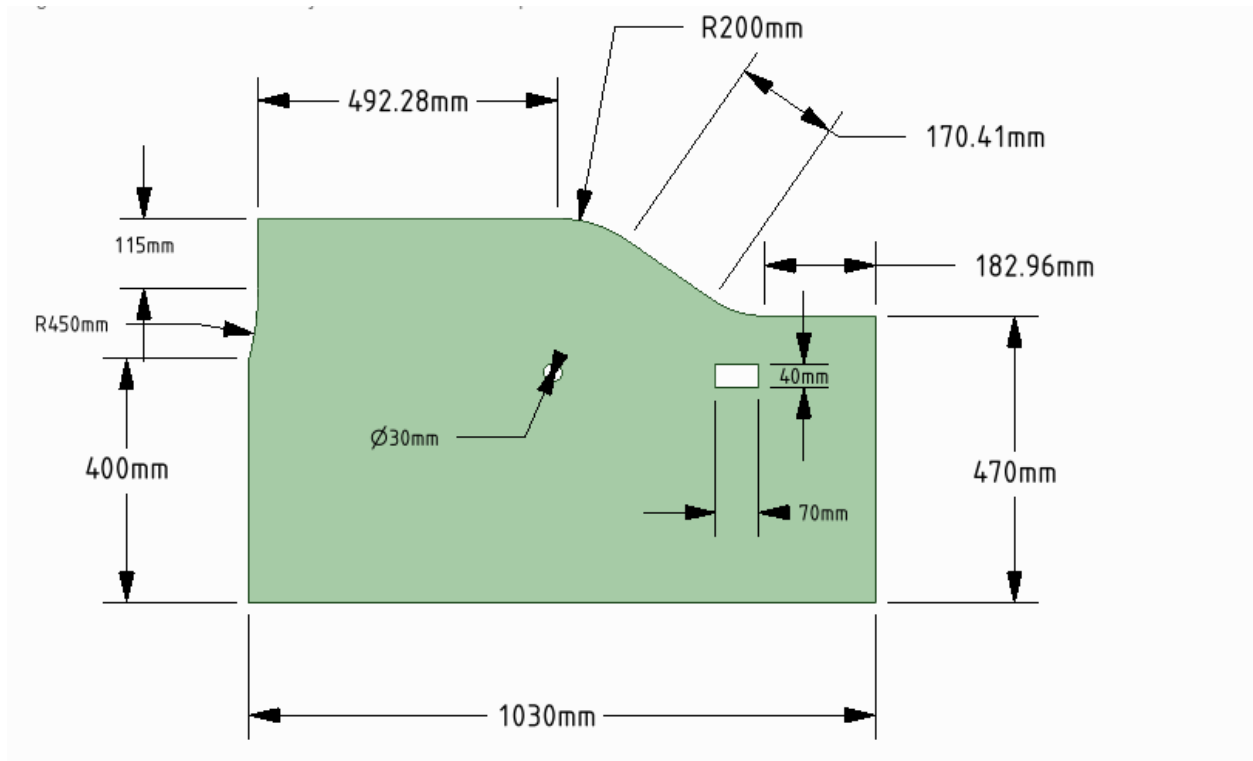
Drawing of the internal door panel (all dimensions are in mm)
